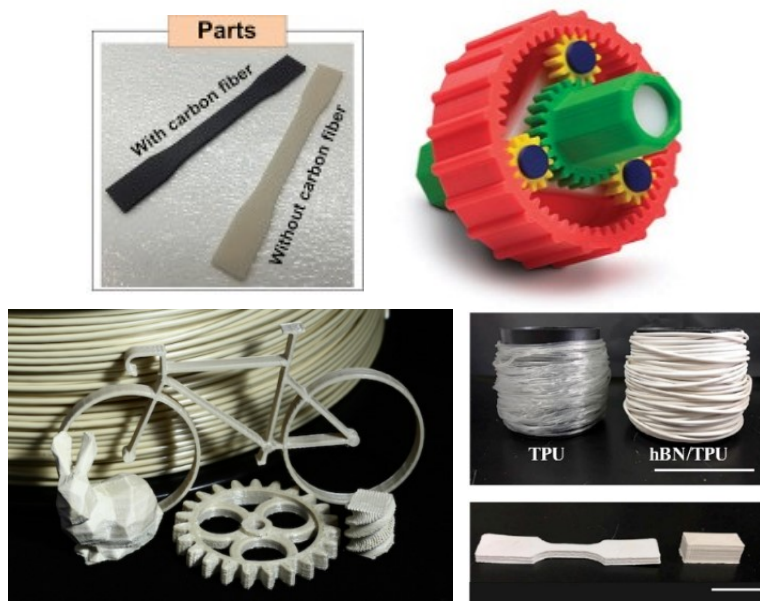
Examples of FDM printed parts[164] [84] [165] [166]
